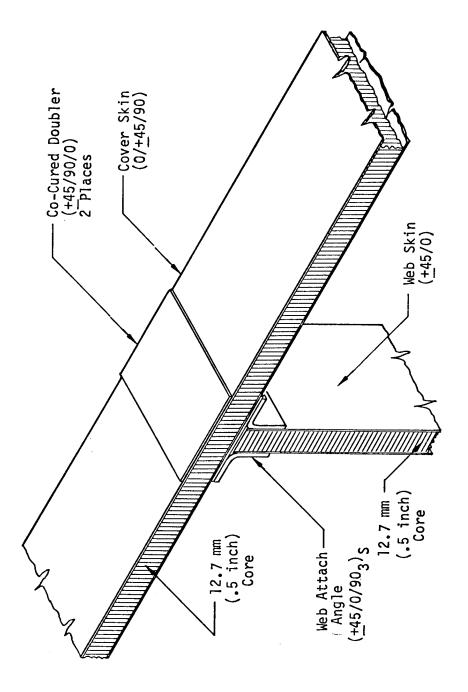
FINAL DESIGN TYPE 1 BOLTED JOINT
